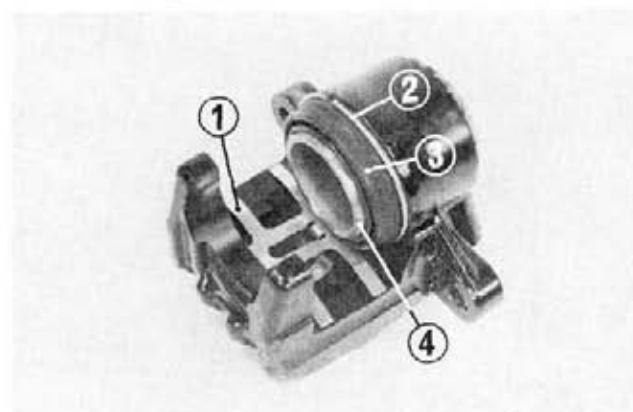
① Pad spring ② Boot clip ③ Piston boot ④ Piston
